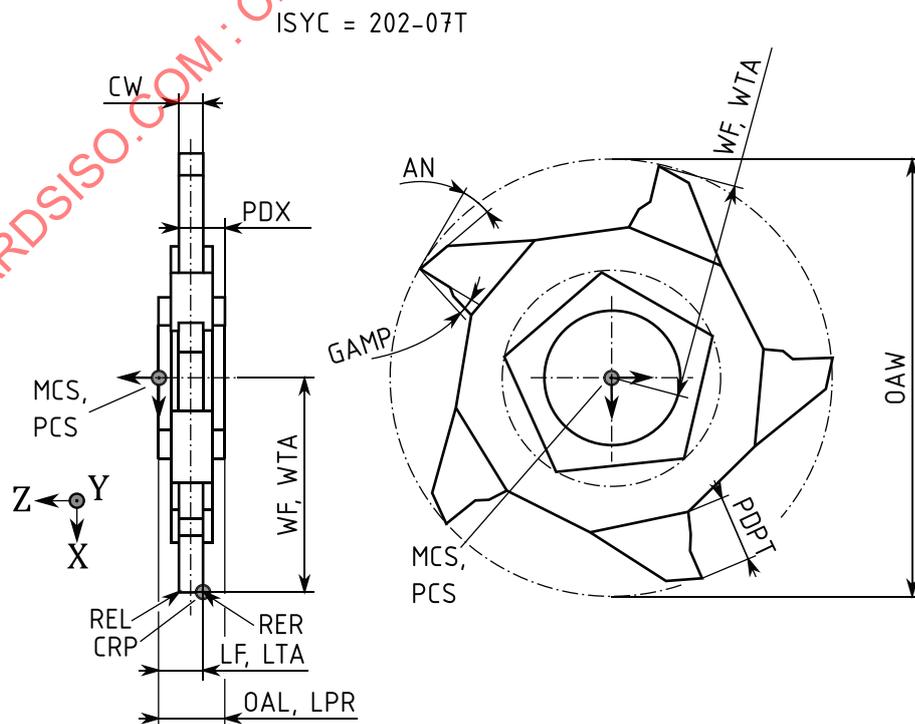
ISYC 202-07T - Solid tool, multiple cutting edges for grooving and parting
